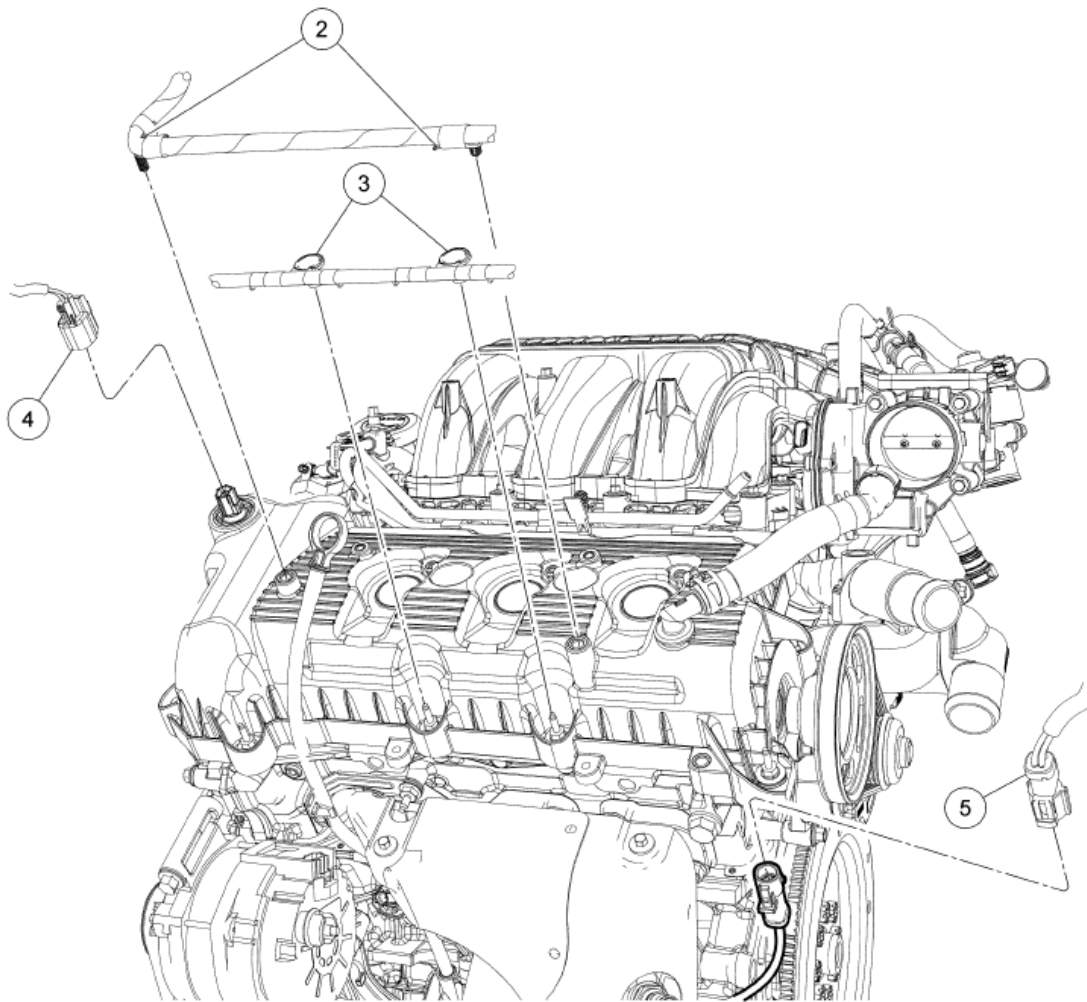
Identifying Valve Cover LH (1 Of 3)
